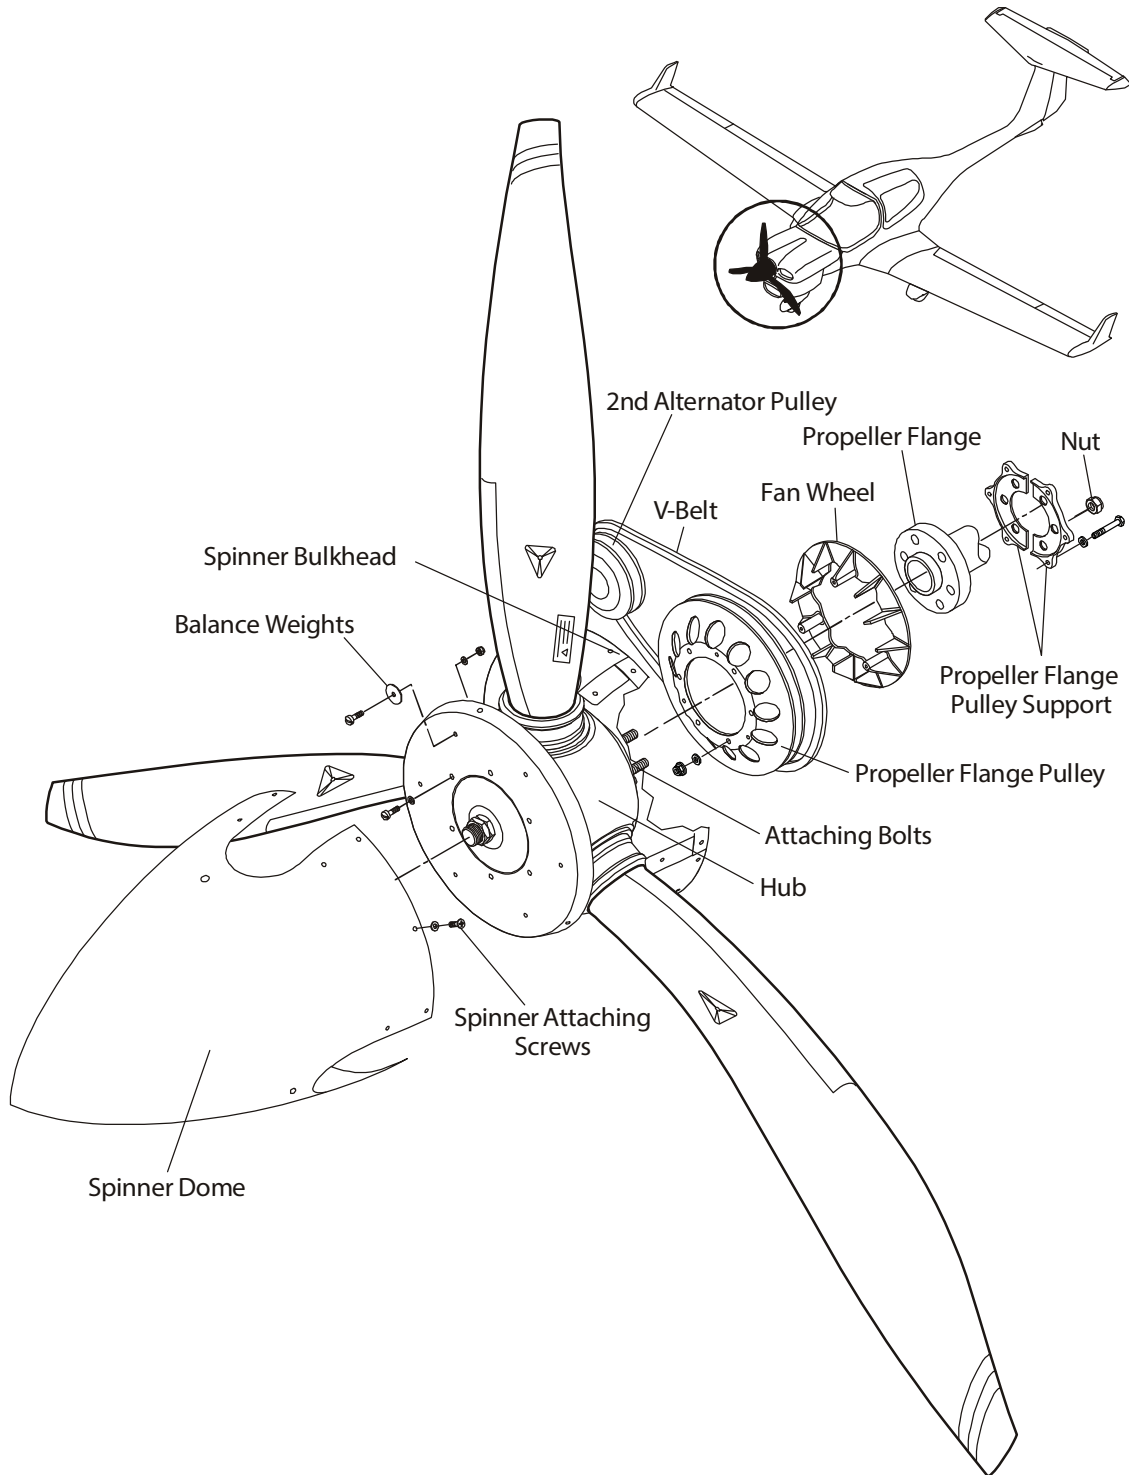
Propeller Assembly (if OÄM 40-314 is installed)
